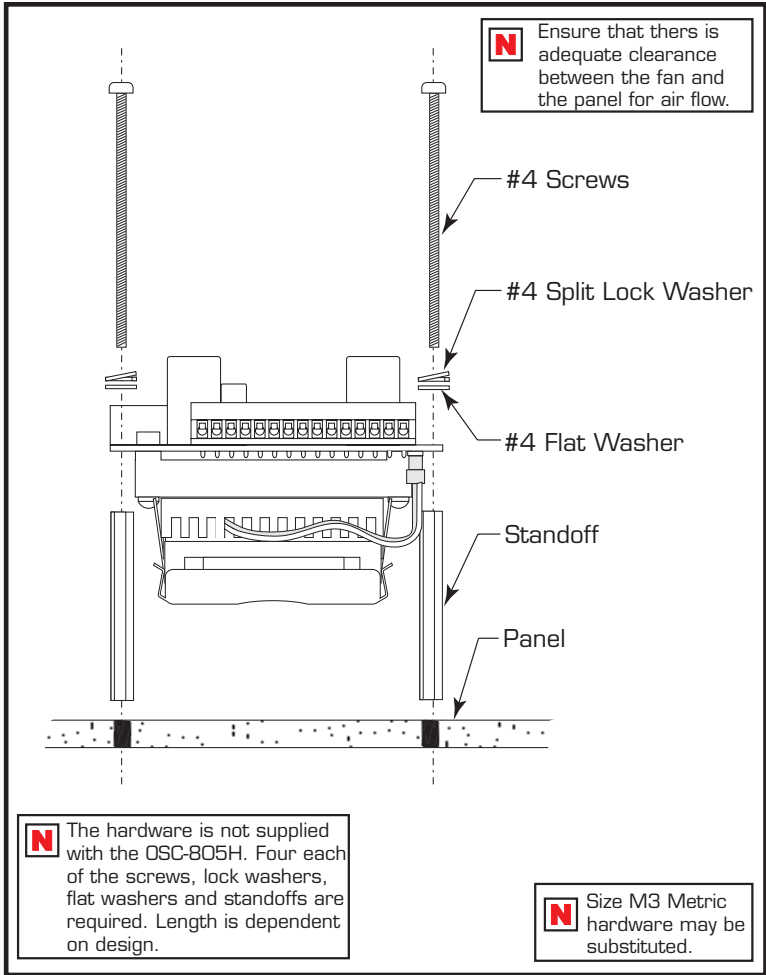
Panel Mounting the OSC-805H/IM805H/HFC-22 Assembly
